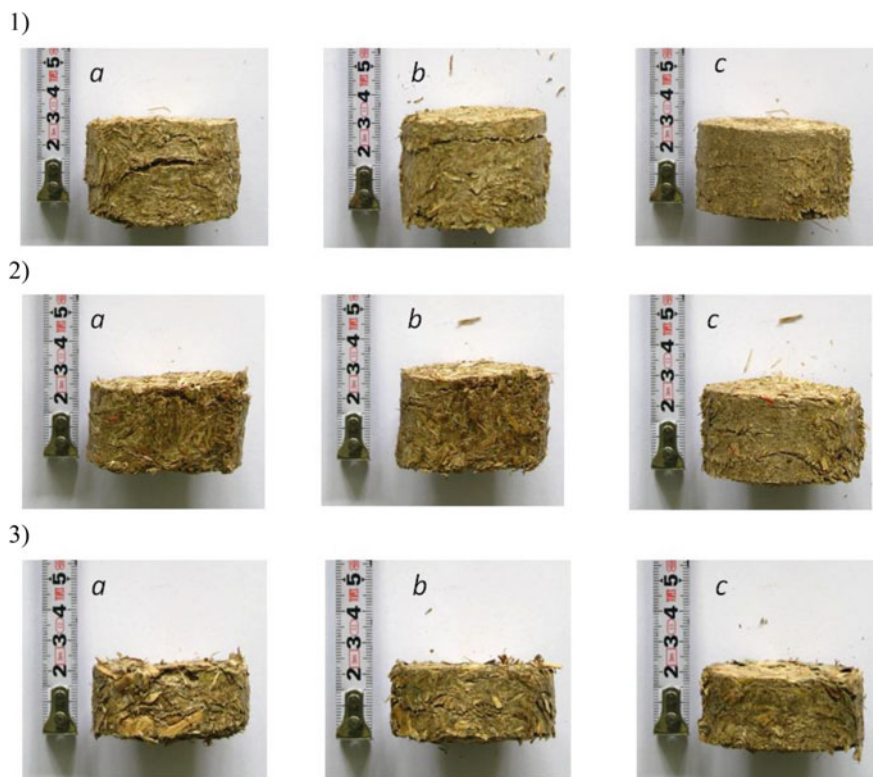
View of example briquettes made of crushed material: 1 on a sieve with hole $\varnothing 10$ mm, 2 on a sieve with hole $\varnothing 15$ mm, 3 chopped raw material; compressed at working pressure: a—27 MPa, b—37 MPa, c—47 MPa
